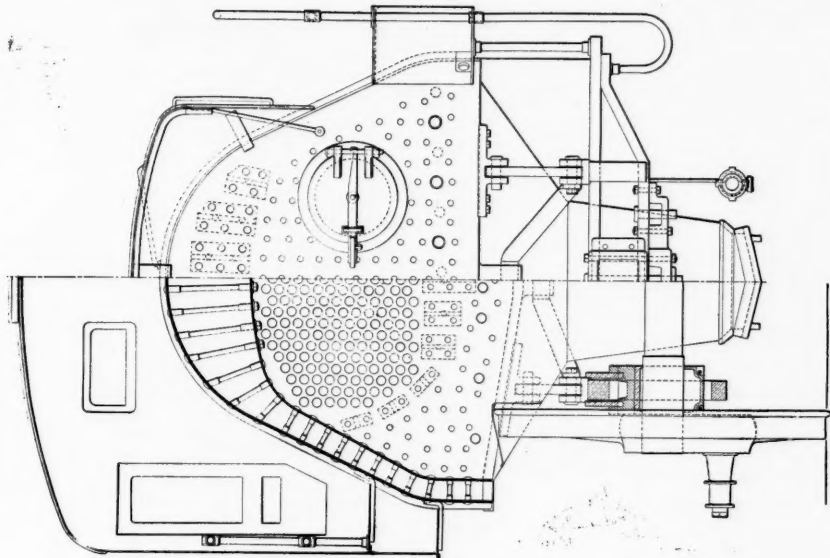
Half Cross-Section through Firebox and Half Rear Elevation.
